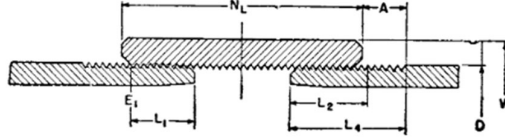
Dimensions of Hand Tight Assembly for Use with Table X3.2
